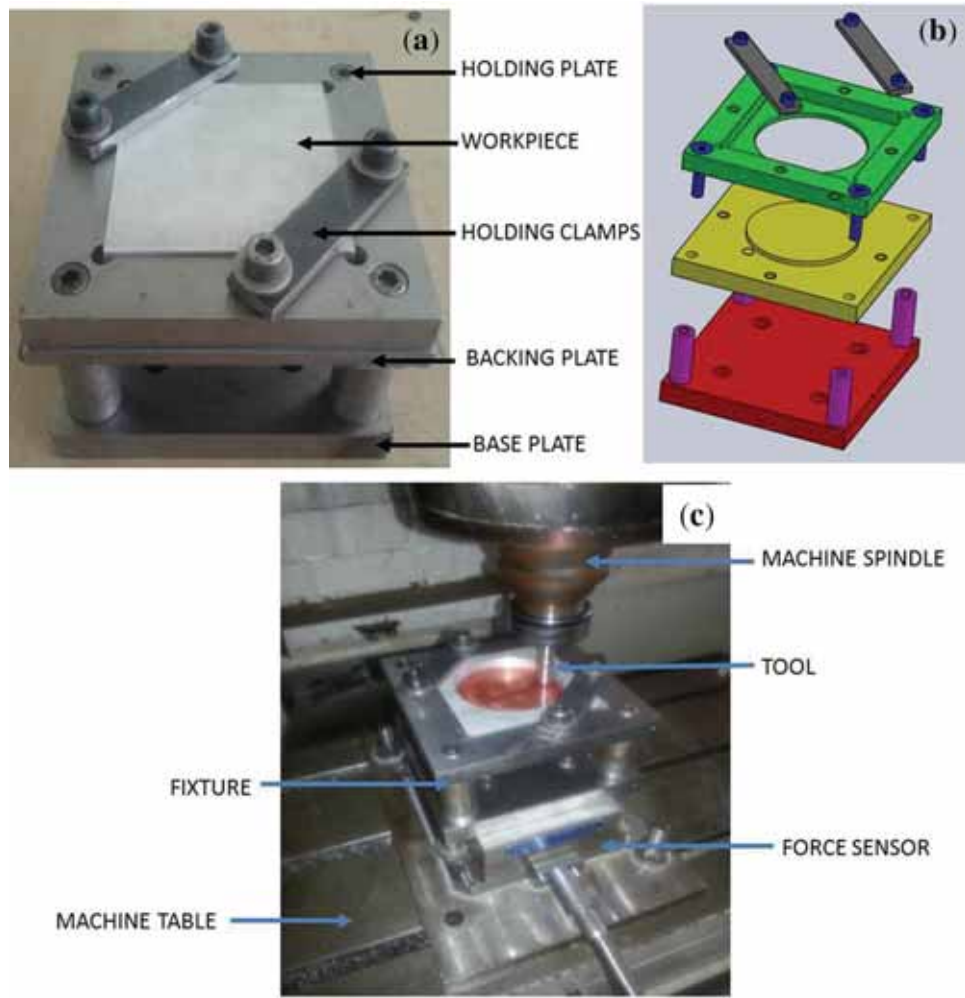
(a) Experimental fixture for DM stretching mode components; (b) exploded view; (c) fixture clamped on force sensor mounted on machine table.
